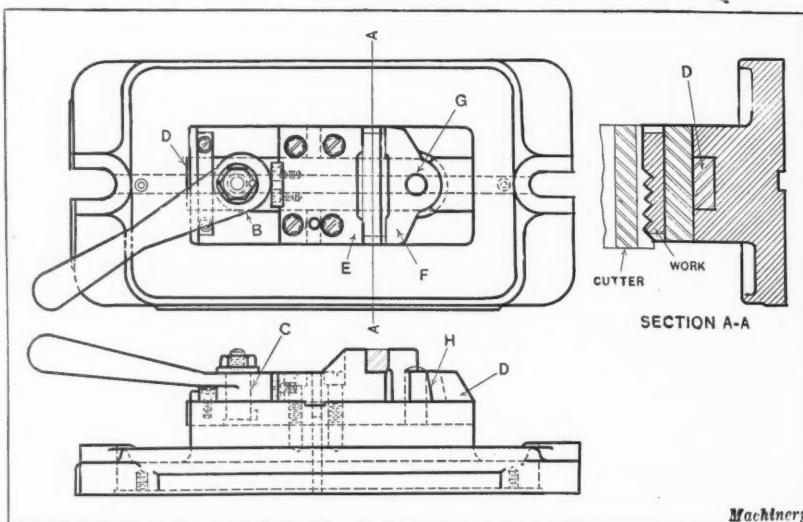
Milling Fixture which will accommodate a Variety of Work
